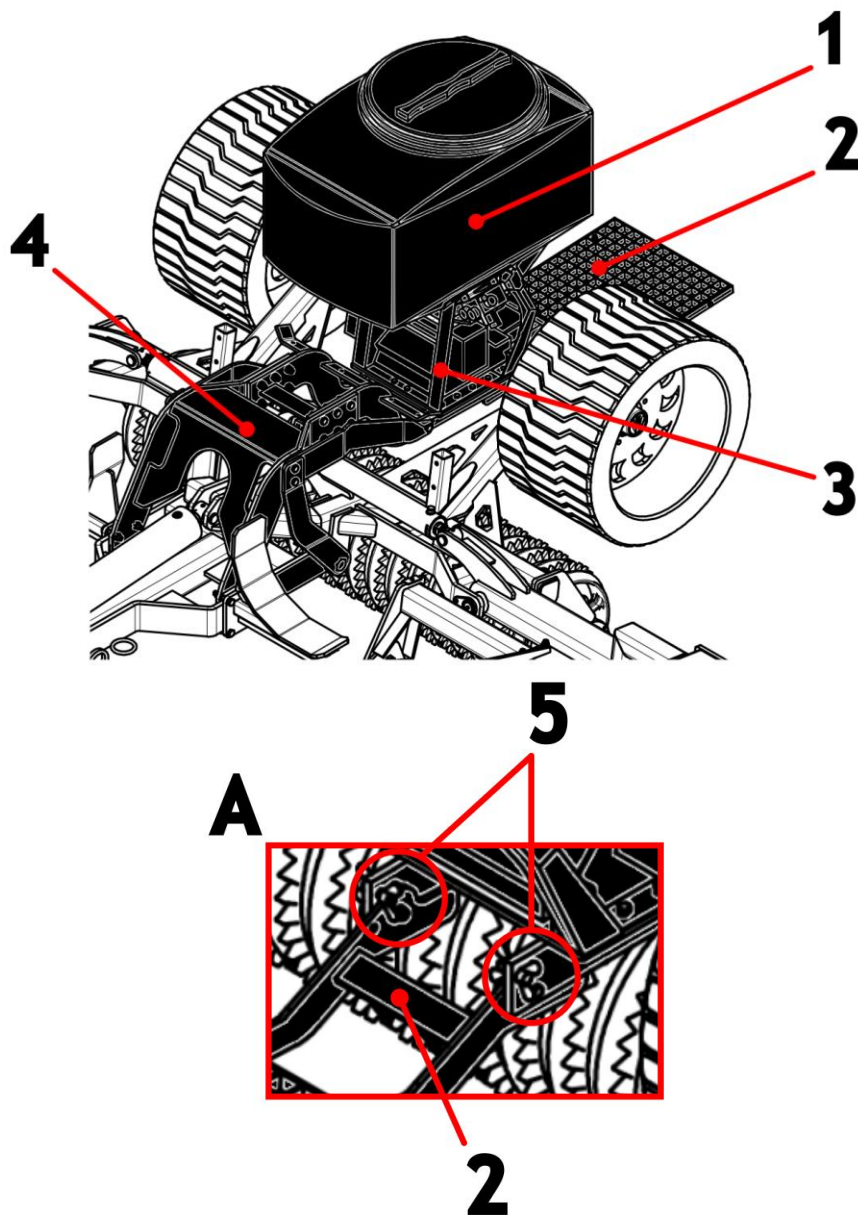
Representation of a mounted seed drill on cultivator roller (1 - seed drill, 2 - access platform, 3 - seed drill mounting frame, 4 - mounting frame)
